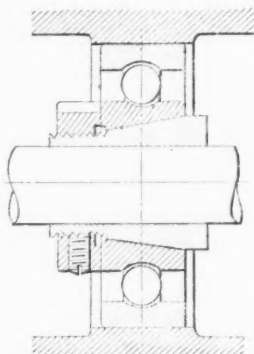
Adapter Bearing for Shafting varying from Standard Size.
